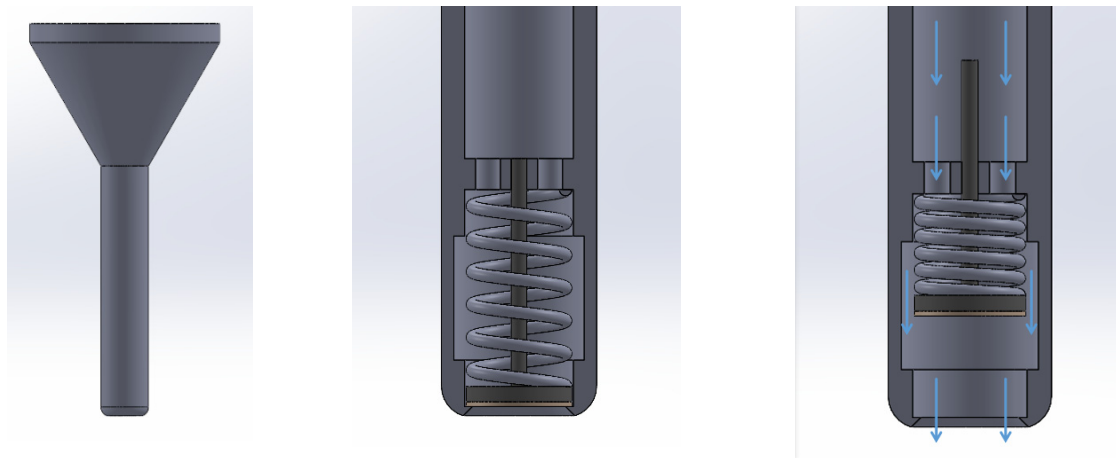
Cross-Sectional View of the Probe and Passive Valve
